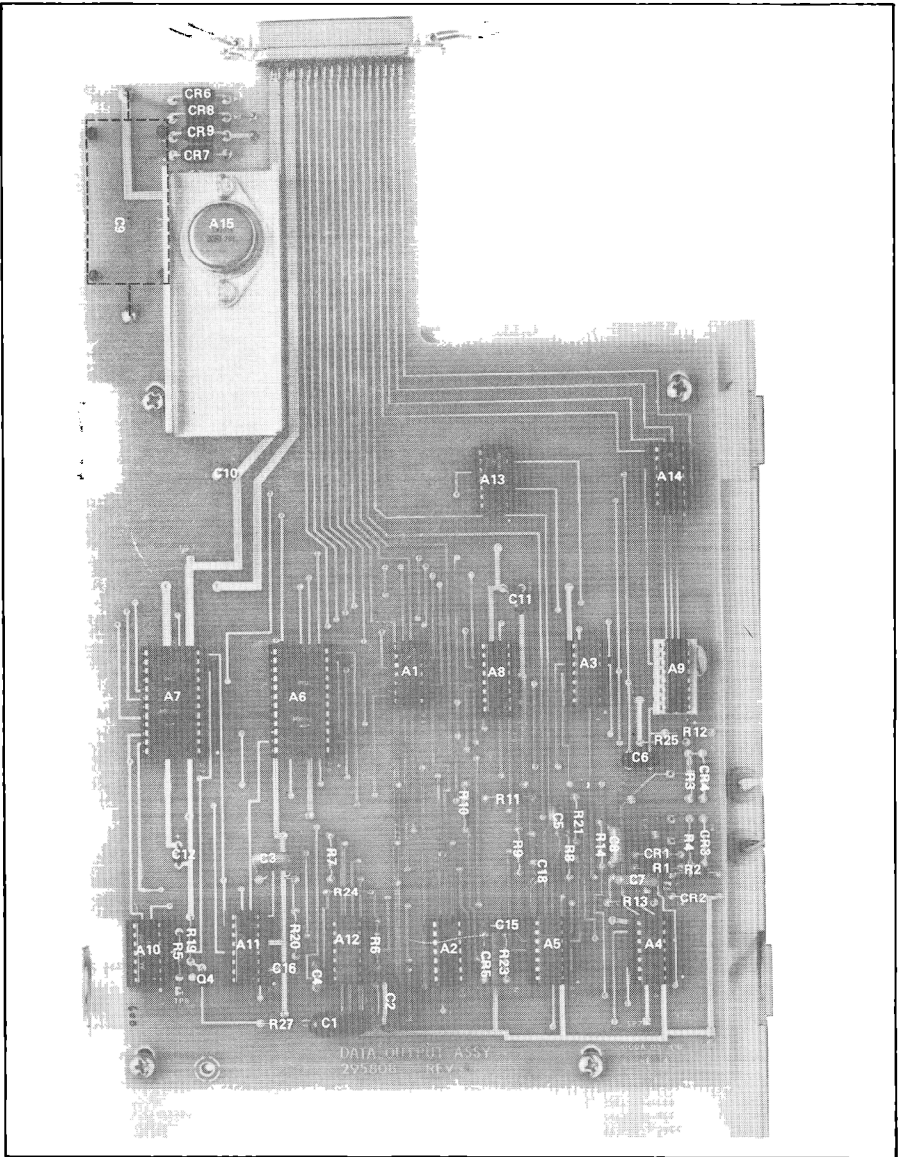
DATA OUTPUT ENCODER PCB ASSEMBLY
